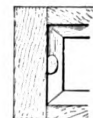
Section of Front, showing Bead along the side of Interior of Cabinet.
